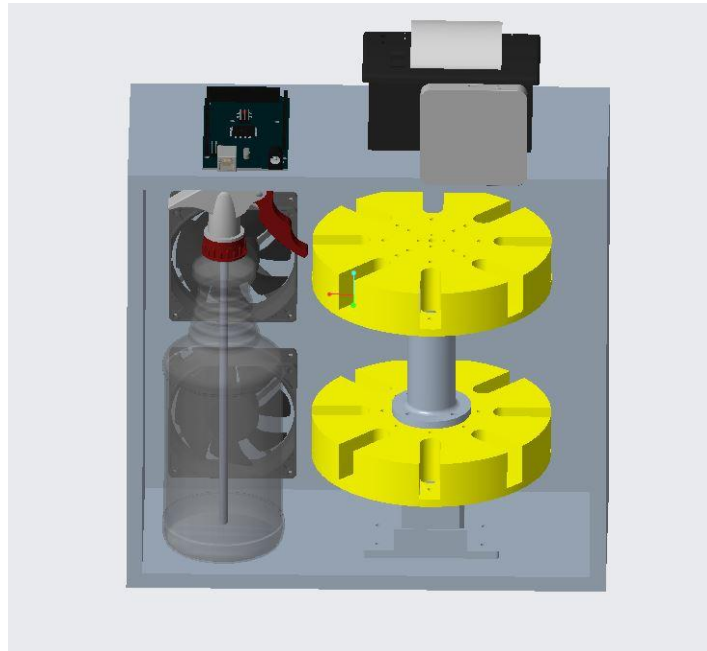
CAD assembly of Covid-19 Convenience Locker(no front cover)
